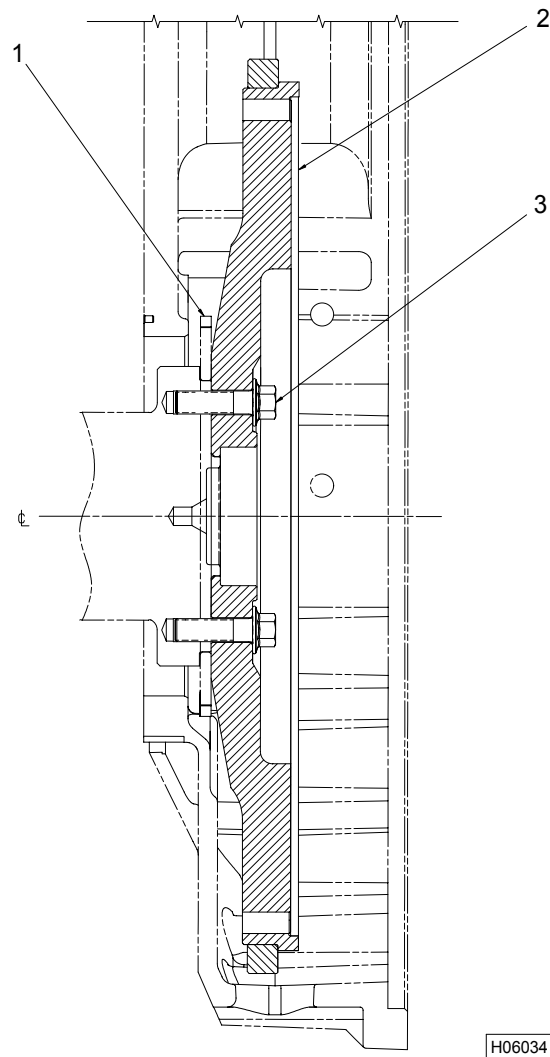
15.5 inch flywheel - for multiple plate clutch applications, 800 lbf-ft and above
